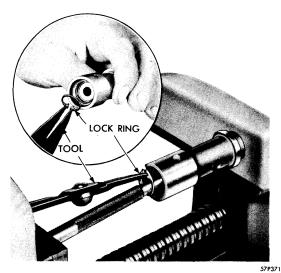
Disassembly of Pressure Relief and Flow Control Valve Using Tool C-3229
